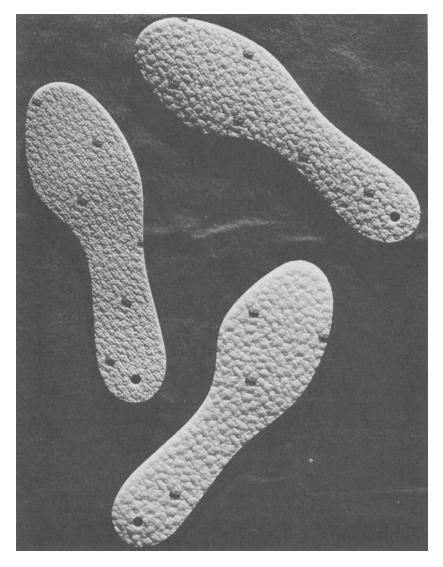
Three outsoles that have been cut with the same die from a premolded sheet having a stippled design. The die can be positioned in any position and produce an acceptable outsole.
